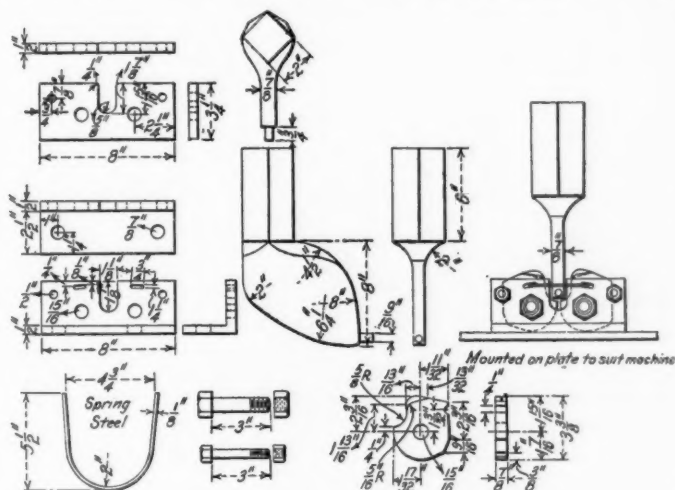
Dies for Bending Cellar Bolts in a Power Punch
